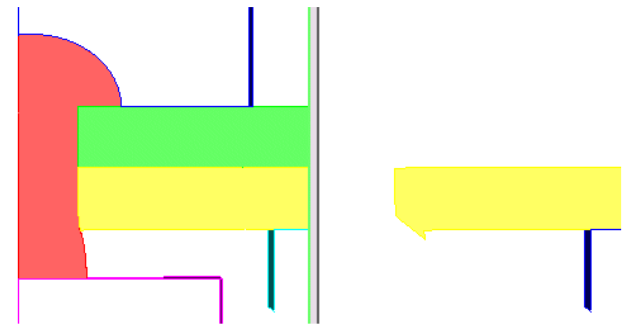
A too large diameter prevents the forming of the rivet. Under traction sheet and rivet go away
